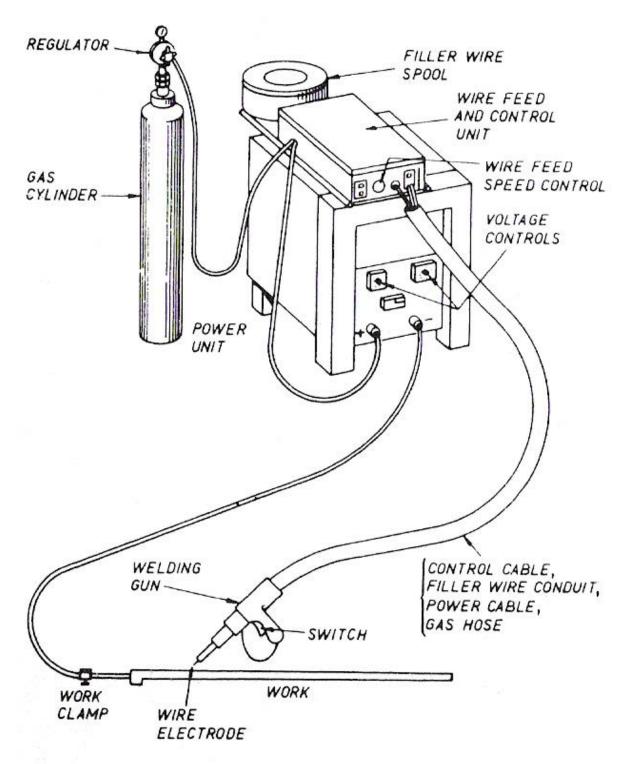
Components of Gas Shielded Metal Arc Welding Process
